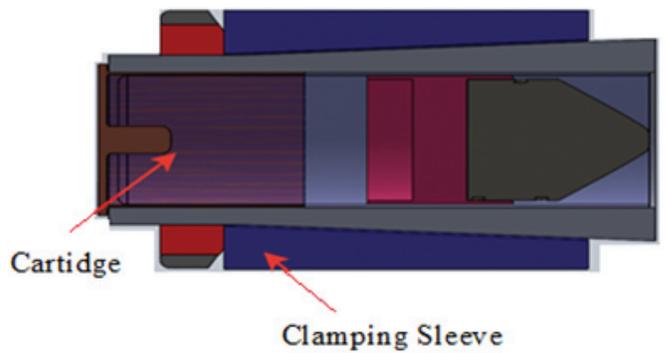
Cross-sections of the shotgun cartridge to be used in the prototype experiment setup and the clamping sleeve to be attached.
